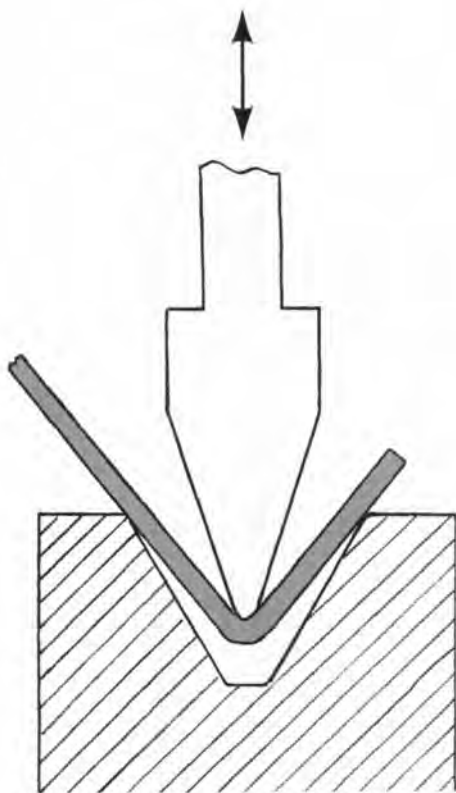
D1c Air bending sheet metal, using a V-die in a press brake.
